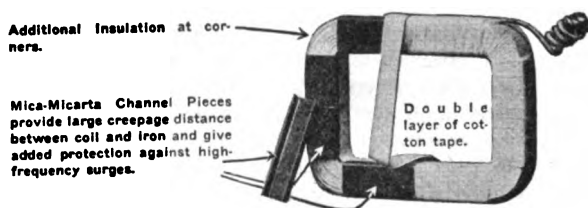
MACHINE-WOUND HIGH-VOLTAGE COIL OF DISTRIBUTED-SHELL (TYPE S) TRANSFORMERS
